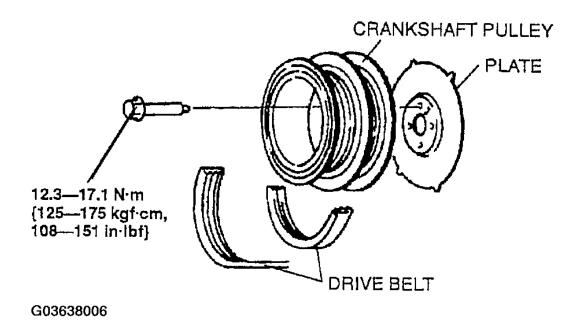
Removing Crankshaft Pulley & Torque Specifications Courtesy of MAZDA MOTORS CORP.
